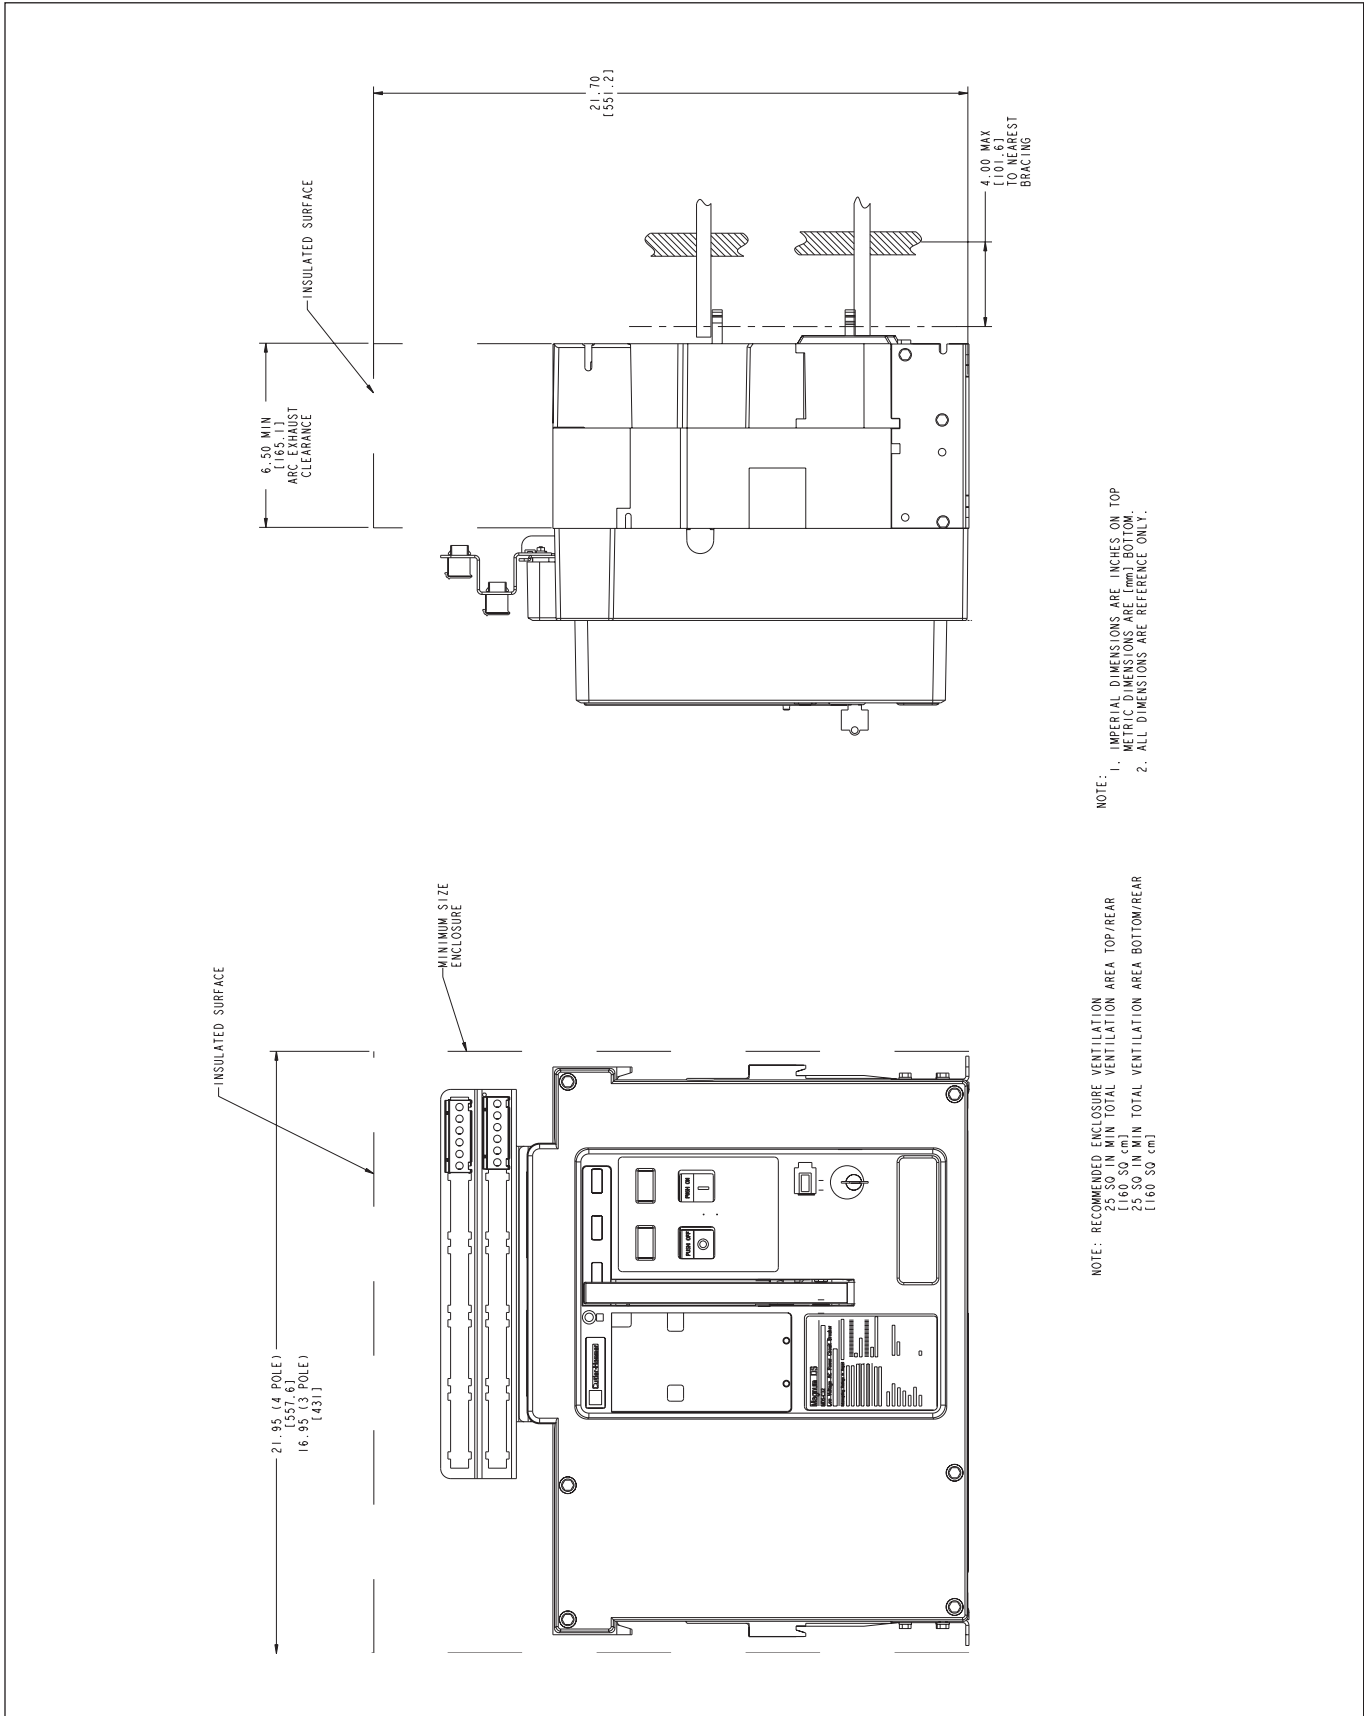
800-1600A Standard frame fixed breaker (Optional front mount terminals)
